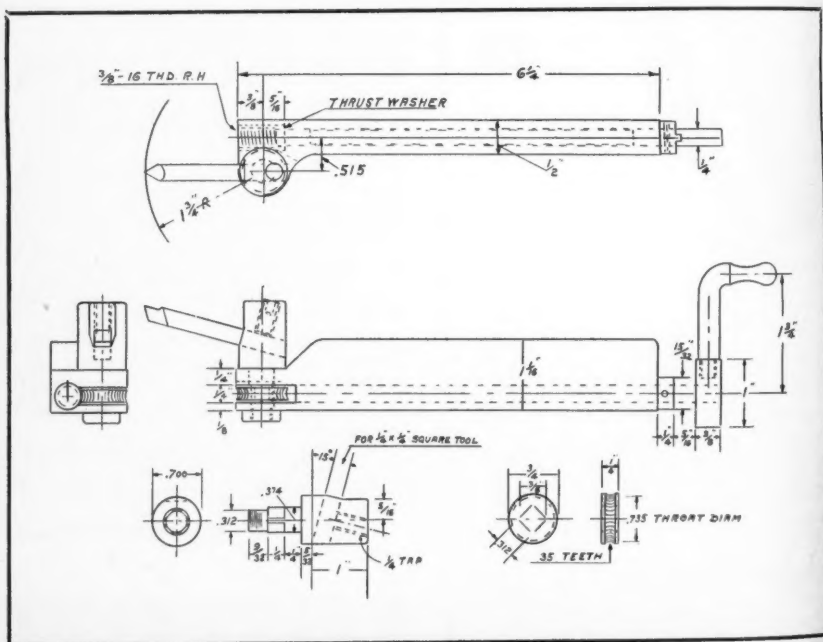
Drawing of Adjustable Radius Turning Lathe Tool
